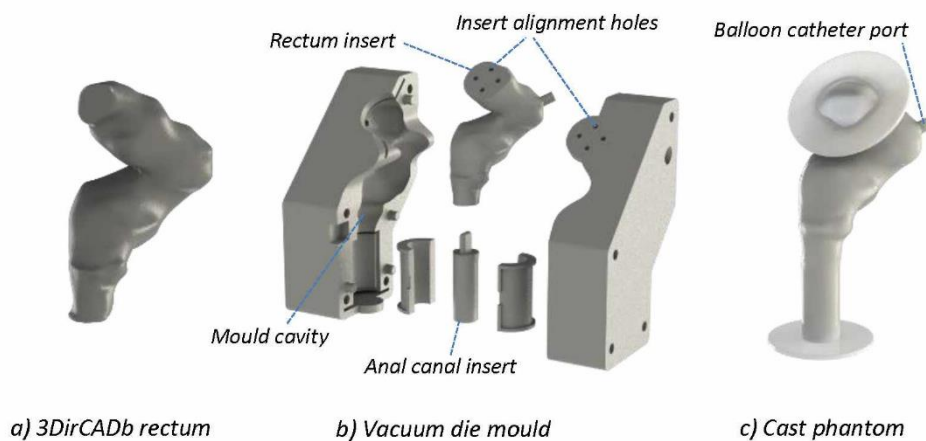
Fabrication process of the rectum model with a) the segmented geometry b) the 3D printed vacuum injection mould and c) a cast rectum model in silicone
